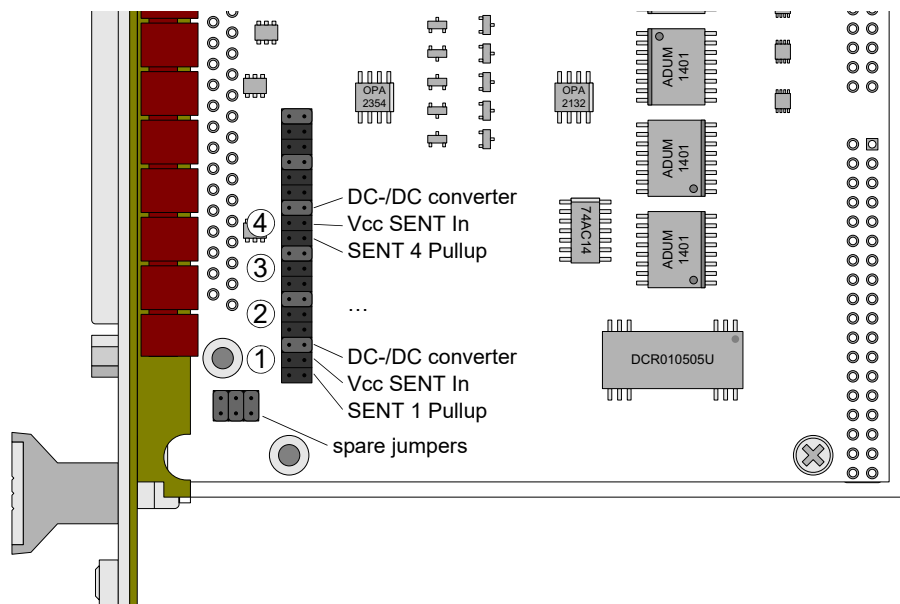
Pro II-SENT-4 Rev. E03: Jumper positions on the printed circuit board
